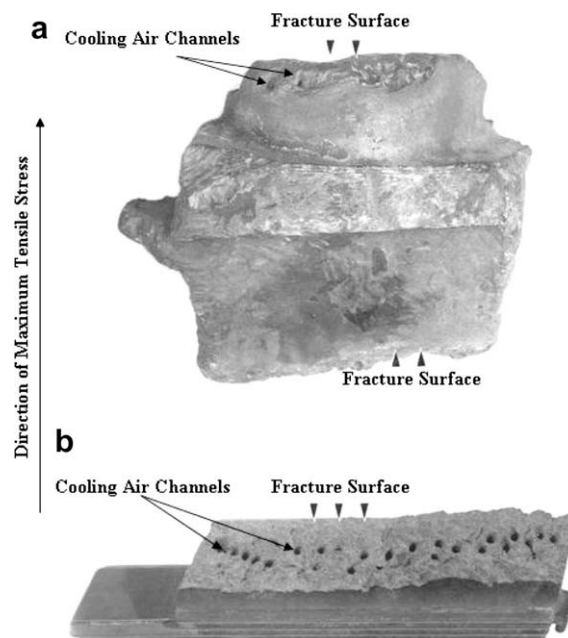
Photographs illustrating the fractured blade in the as-received condition. (a) A view of the airfoil showing macroscopic distortion. (b) A view of the lower section of the fracture surface showing the cooling air channels.
